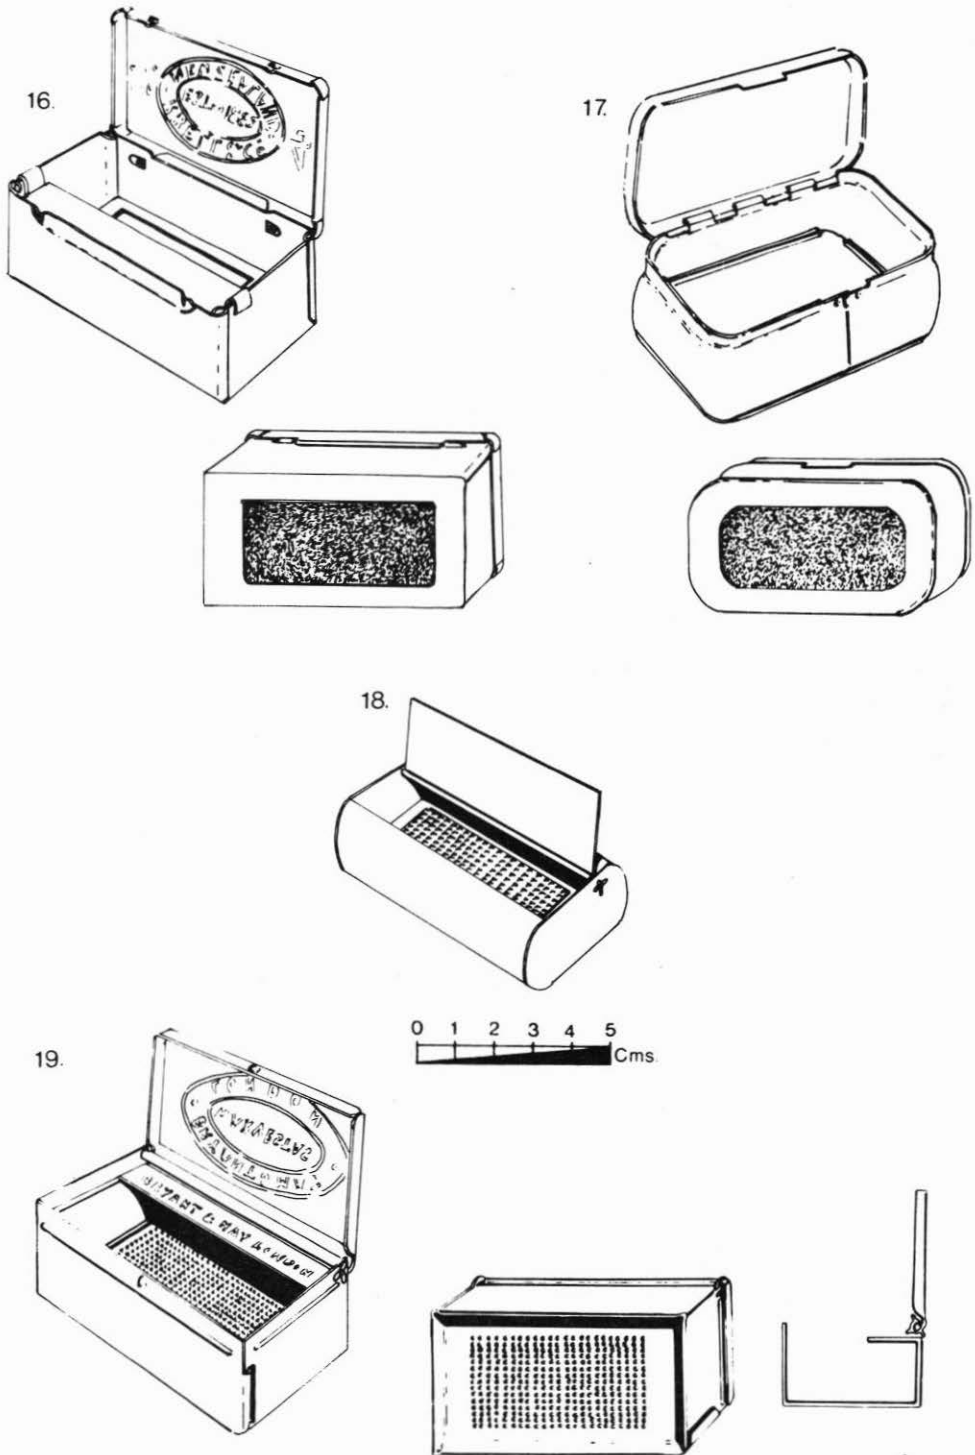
Construction details of box types 16-17 (R. Bell & Co.) and types 18-19 (Bryant & May).
